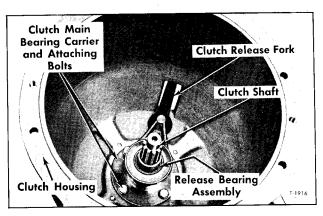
Clutch Fork and Drive Shaft Installed in Clutch Housing
